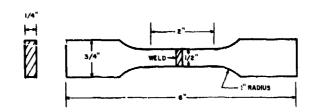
Specimen geometry for tensile, fatigue, and Charpy impact tests of welded ASTM A-514 steel.
